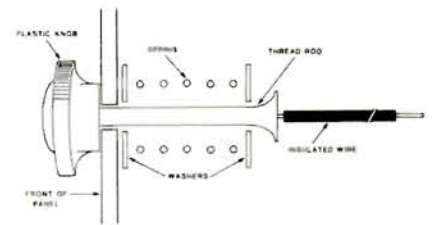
Side view of front panel (cut-away view) showing location of assembled parts.
